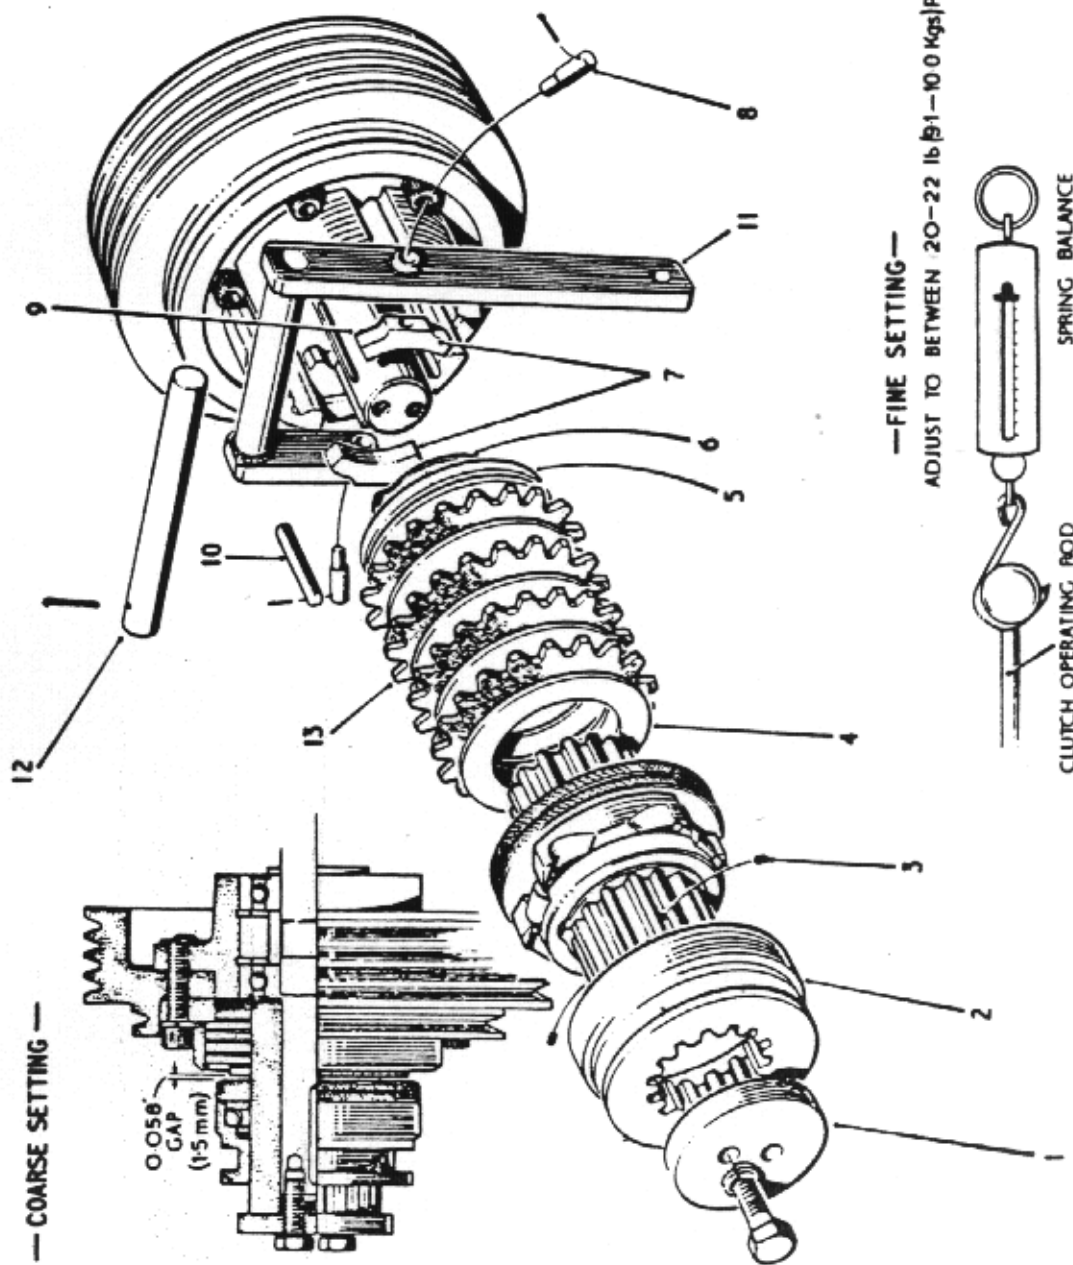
REPLACEMENT OF CLUTCH FRICTION PLATES
